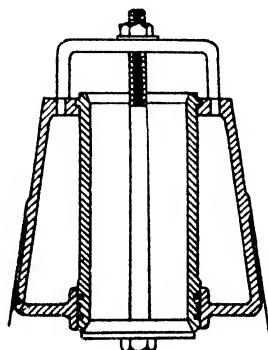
Showing method of removing Cylinder Liner by means of Nut and Screw device.
